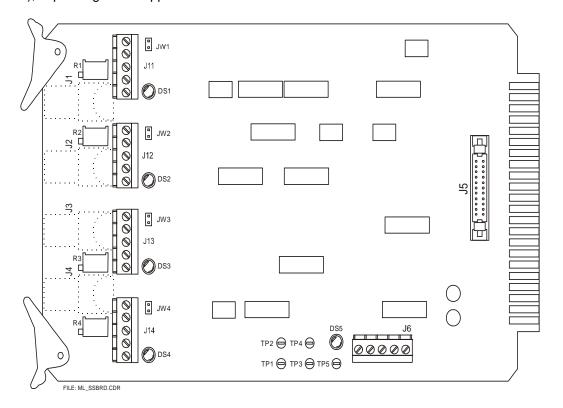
D-4: Dedicated solid state AEC board (assembly 733347)
